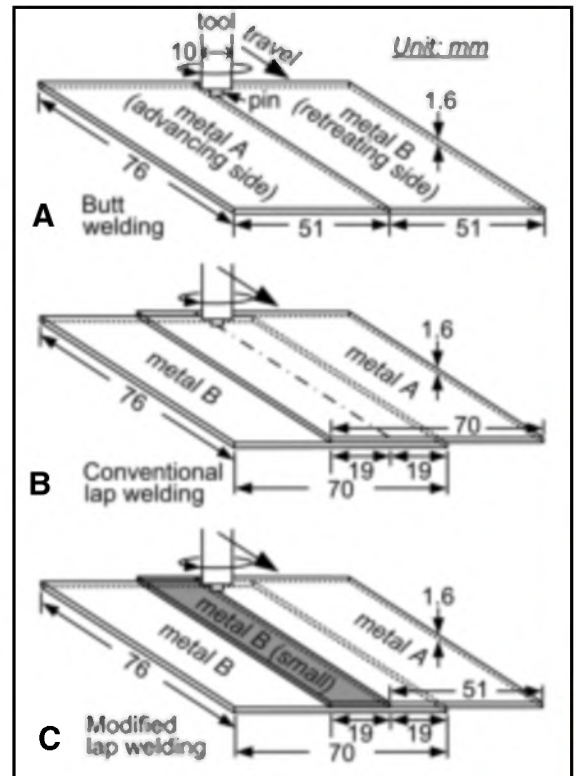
Friction stir welding of metal A to metal B. A — Butt joint; B — conventional lap joint; C — modified lap joint (butt joint welding a small piece of metal B to metal A with pin penetration into bottom metal B). Advancing side — material pushed forward by tool; retreating side — material pushed backward.
